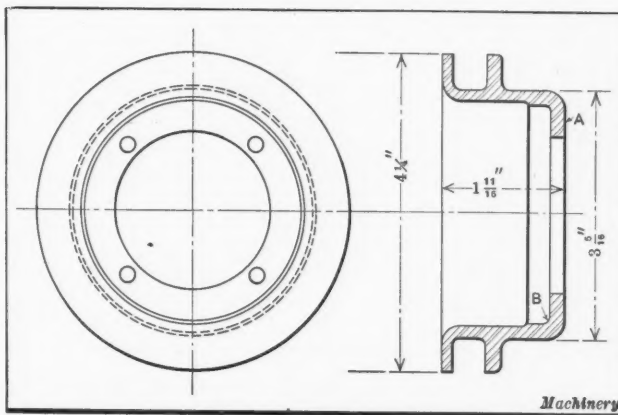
Retractor Collar which has Surface A faced by a Bardons & Oliver Turret Lathe
